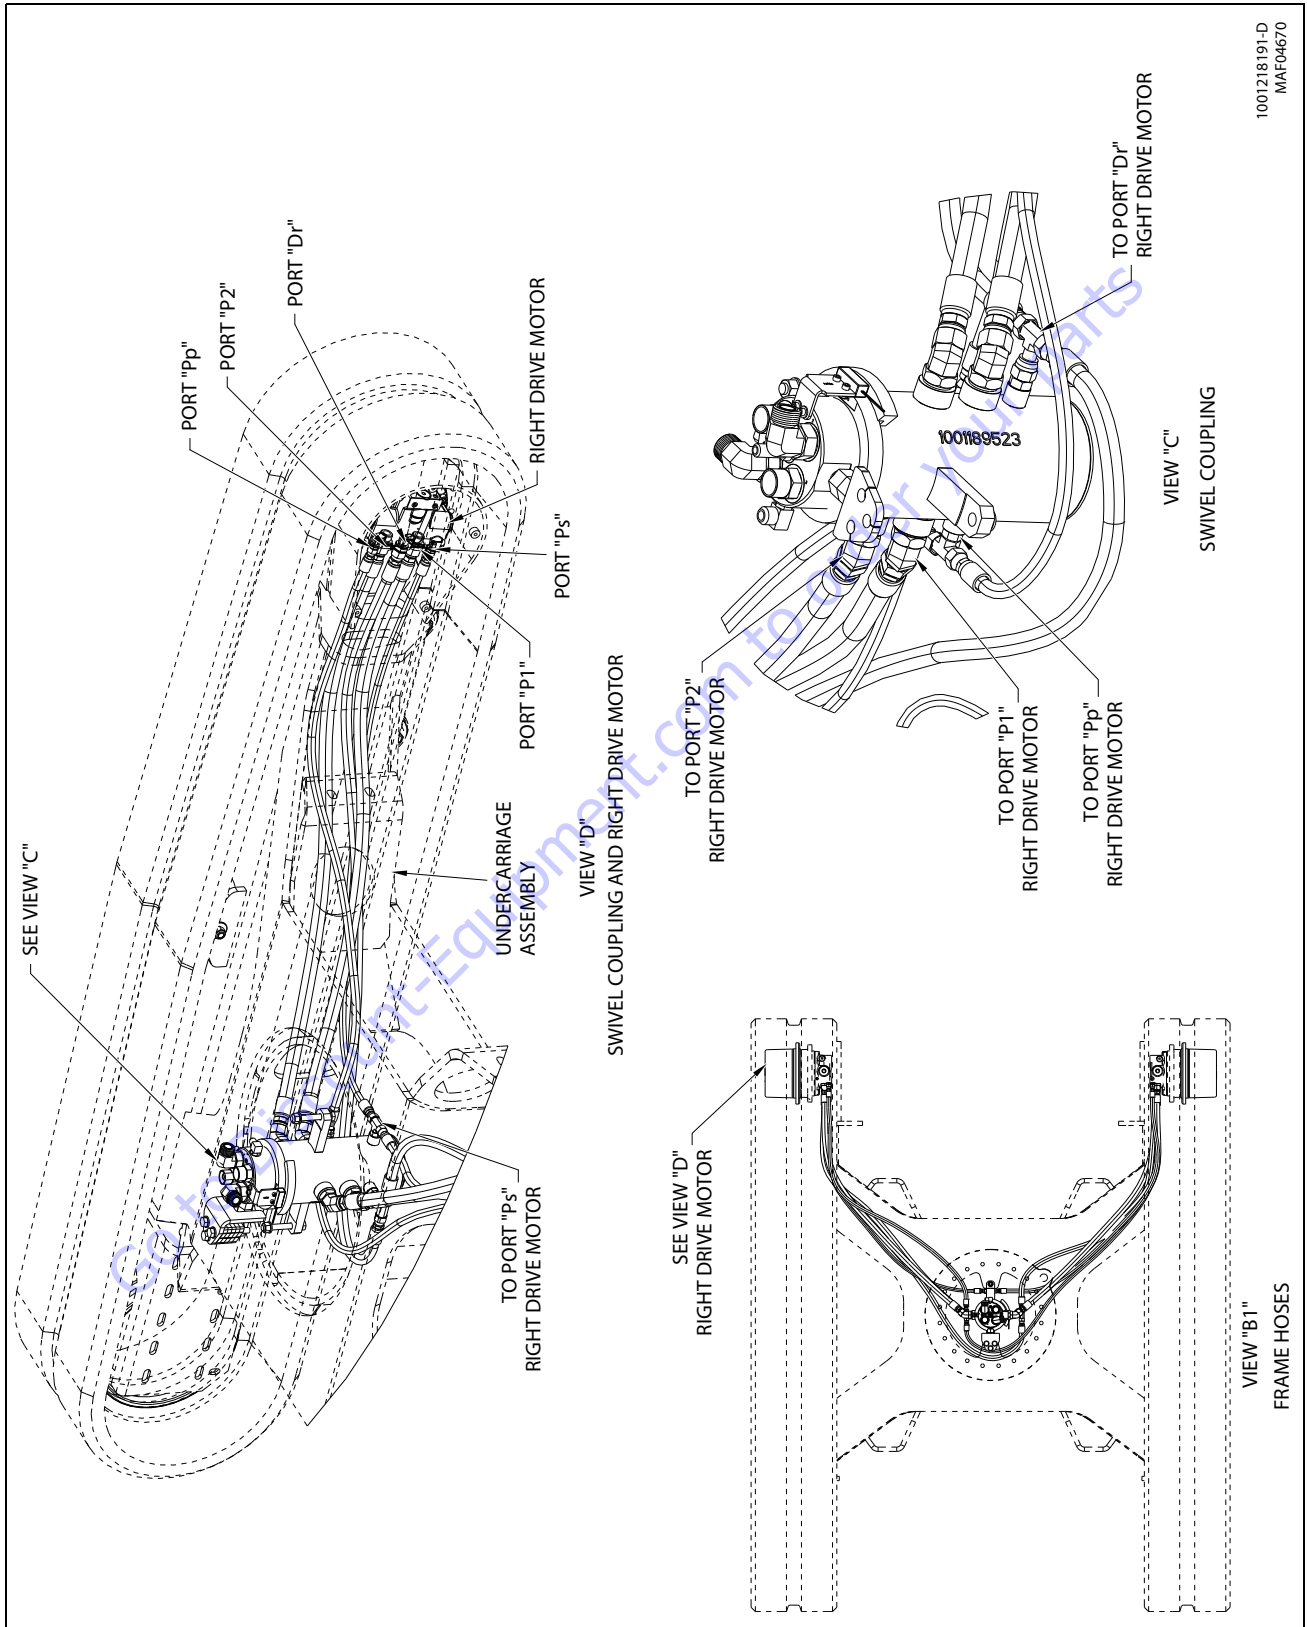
Hydraulic System Installation (460SJC) - Sheet 6 of 15
